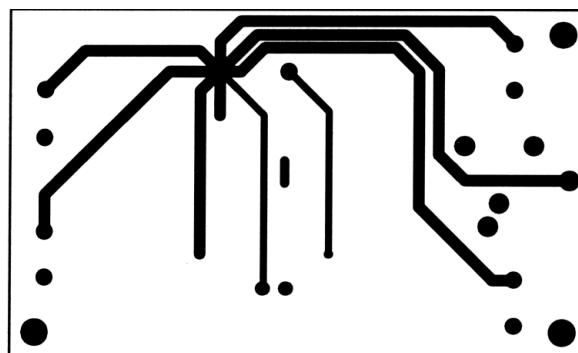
Recommended DGK0008A PC Board Layout Bottom-Side Layout
